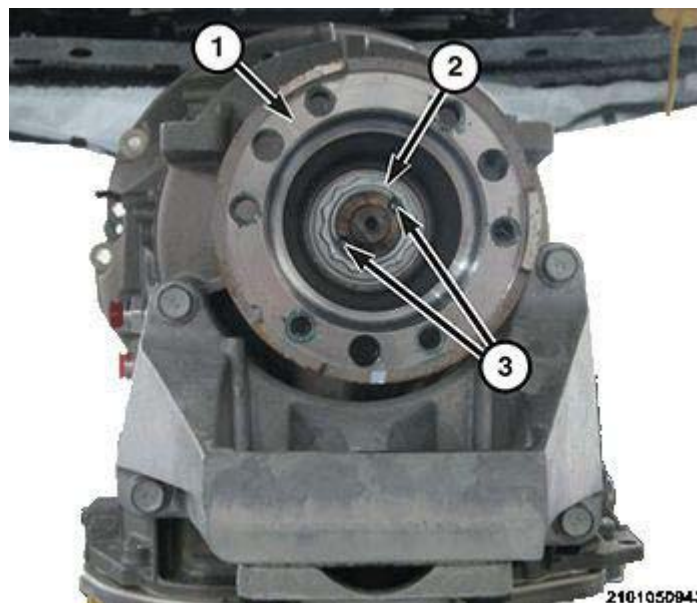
Drive Shaft Flange, Nut & Staking Area
